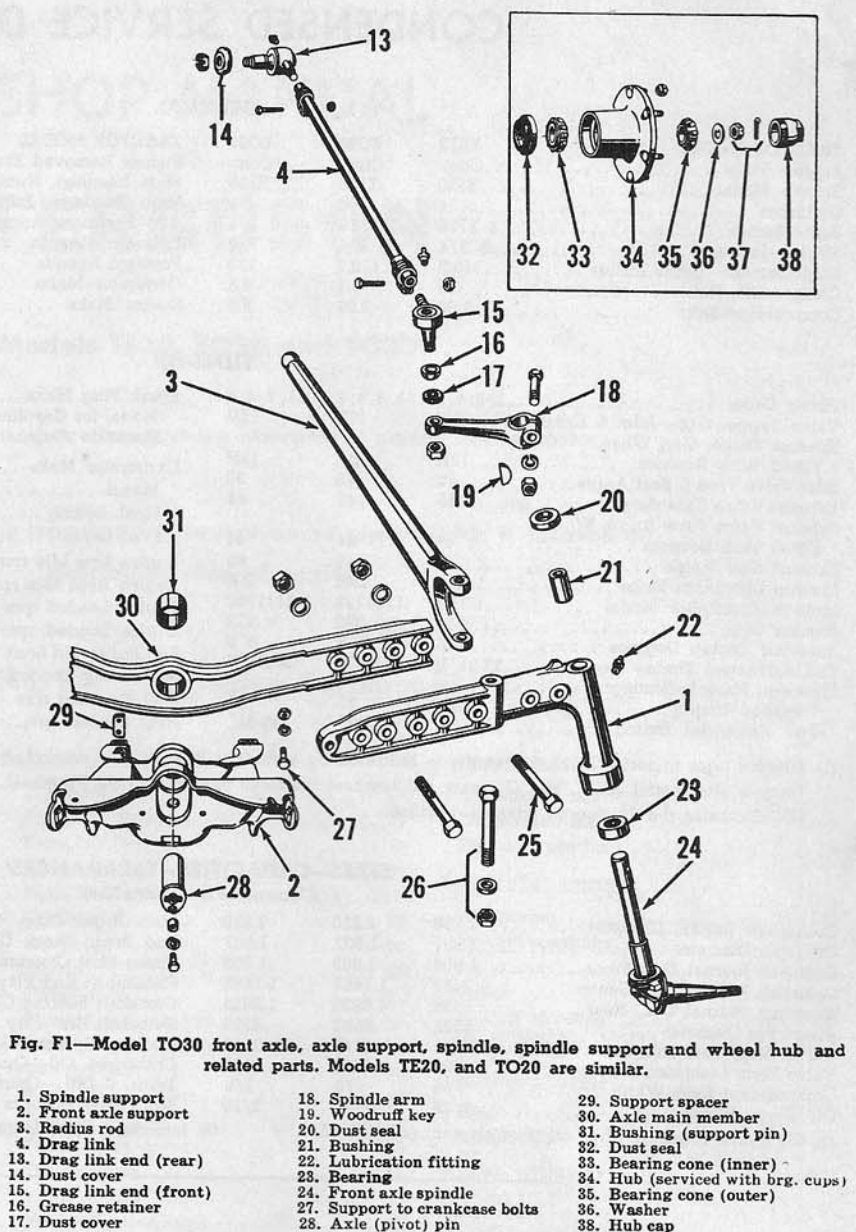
Model TO30 front axle, axle support, spindle, spindle support and wheel hub and related parts. Models TE20, and TO20 are similar.
